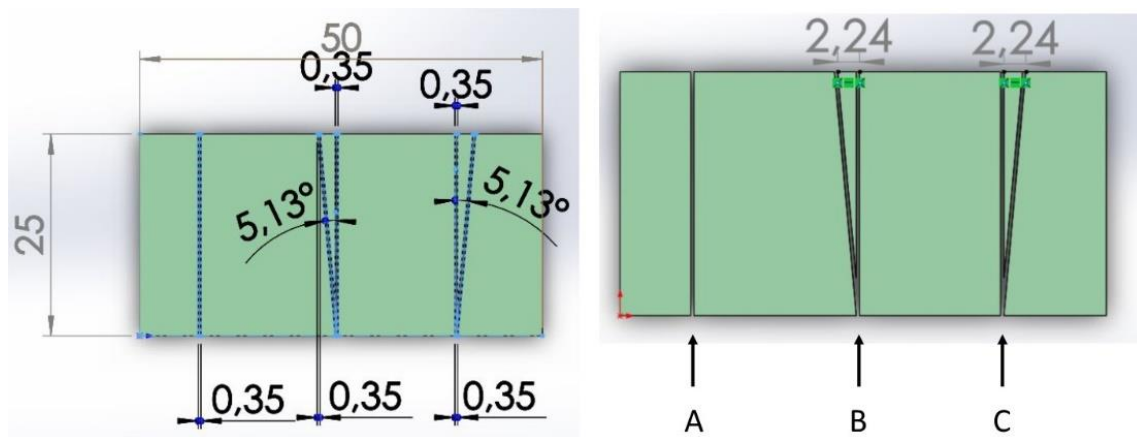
Three different cutting paths in a block with dimensions of 25x50 mm, cut through with a saw blade (cutting width of 0.35 mm, as the current blade)³⁸. Path A) the straight and intended path. Path B) The resulting cutting path after the saw blade perceives a counter-clockwise angulation of 5.13° results in a 2.24 mm distance at the left from the intended path. Path C) The resulting cutting path after the saw blade perceives a clockwise angulation of 5.13° results in a 2.24 mm distance at the right from the intended path.³⁸
